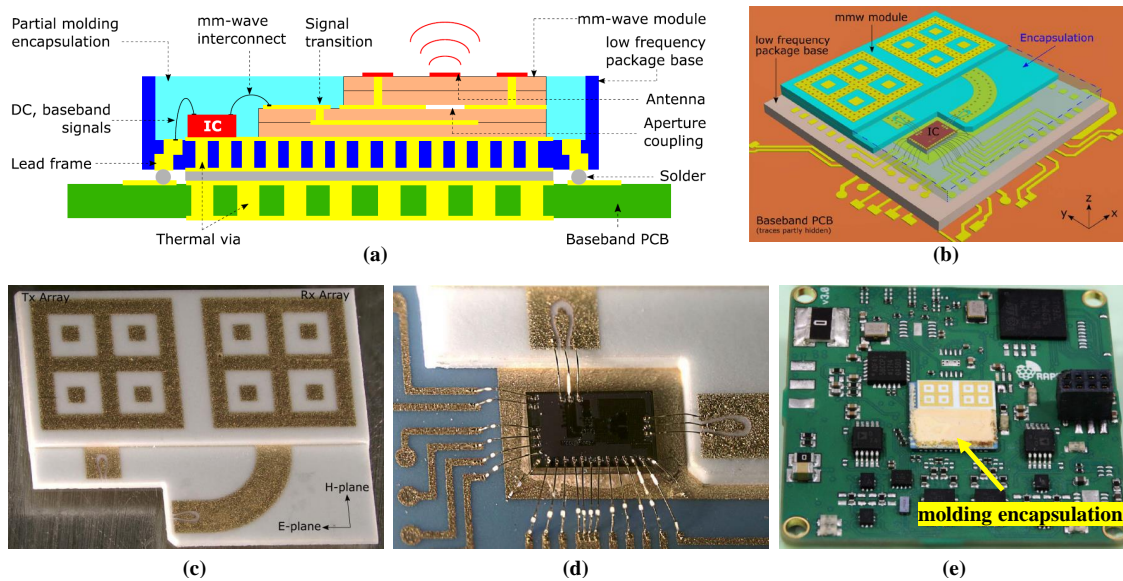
A 122 GHz radar SiP using LTCC. (a) Cross section. (b) Packaging structure. (c) Manufactured prototype of mm-wave module. (d) Wirebond interconnects between IC and mm-wave module. (e) SiP mounted on a baseband PCB. [12]
